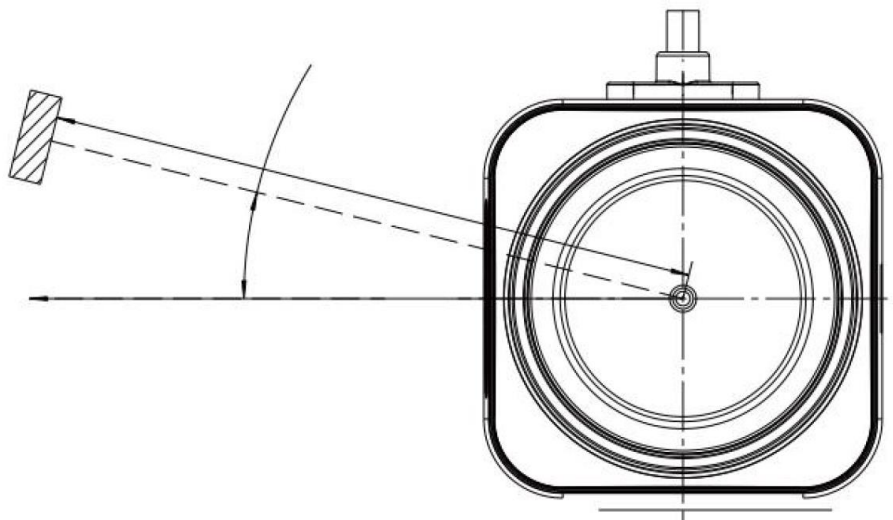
Mechanical Dimensions of Optical Window Units (mm)
